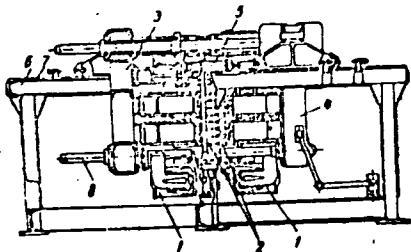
1 - welding transformers; 2 - welding guns; 3 and 4 - vertical plates; 5 - driving mechanism for plates; 6 - frame; 7 - guides; 8 - rods
